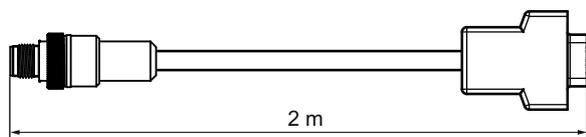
Connecting cable M12 ↔ sub-D (MOBY D)
